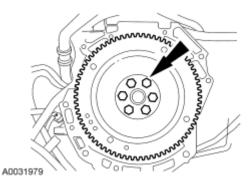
Locating Flexplate Bolts Courtesy of FORD MOTOR CO.
